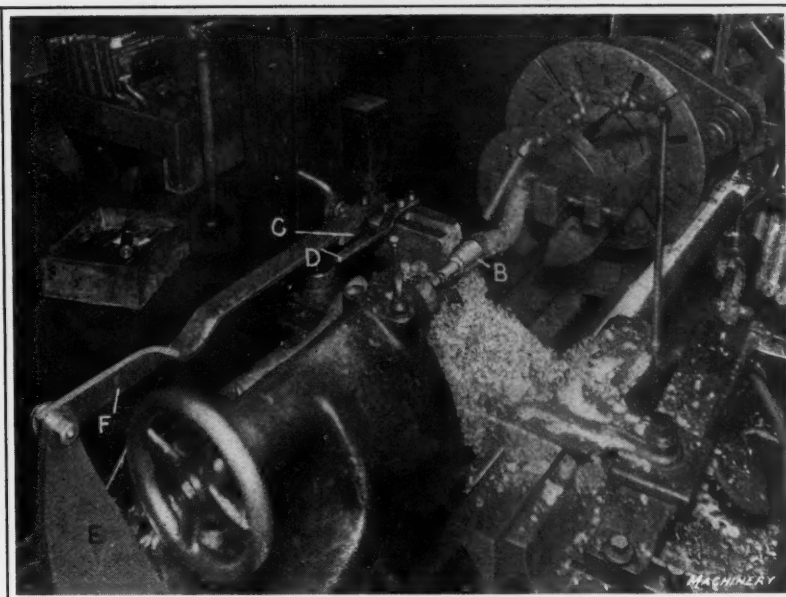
Engine Lathe equipped with a Special Combination Straight and Taper Turning Attachment
